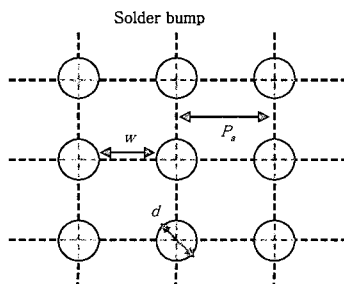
The patterns of solder bump in flip chip⁹⁾
